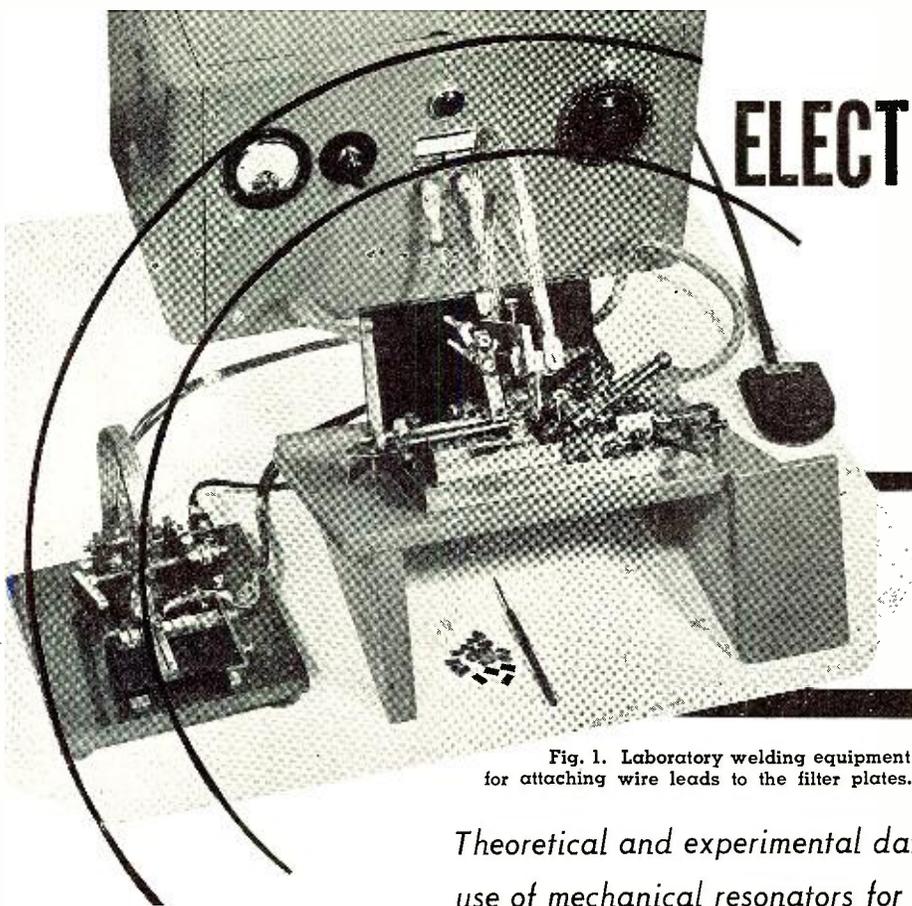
Laboratory welding equipment for attaching wire leads to the filter plates.
